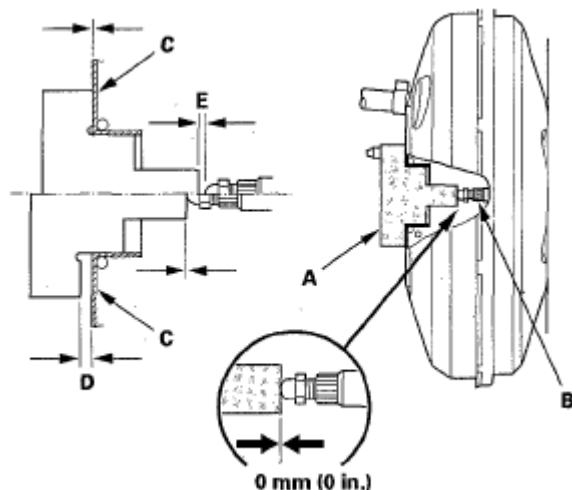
Identifying Clearance Between Tool With Master Cylinder And Brake Booster Pushrod
